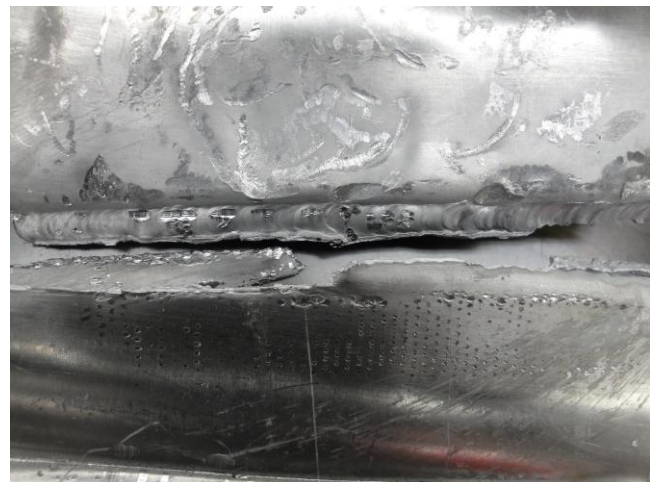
Fillet Weld Fracture Test for PQR
